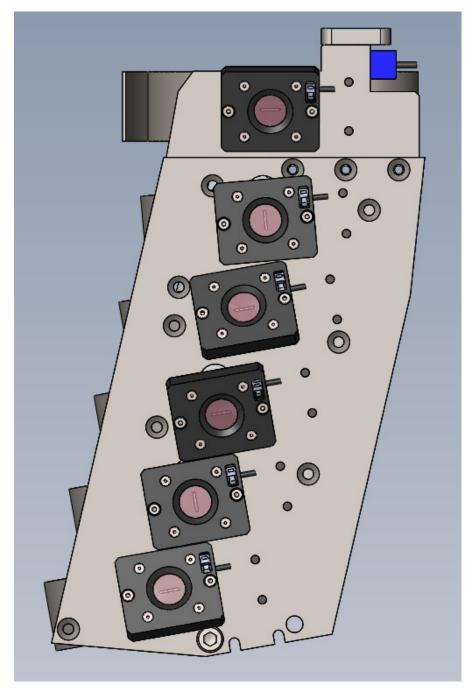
RibEye sensor assemblies mounted to spine (ribs not shown)
